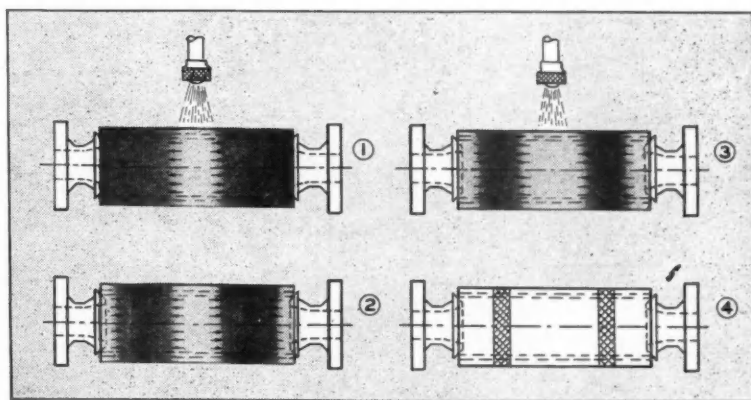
Diagram showing the progress of cooling and solidification in a tube which is too long
